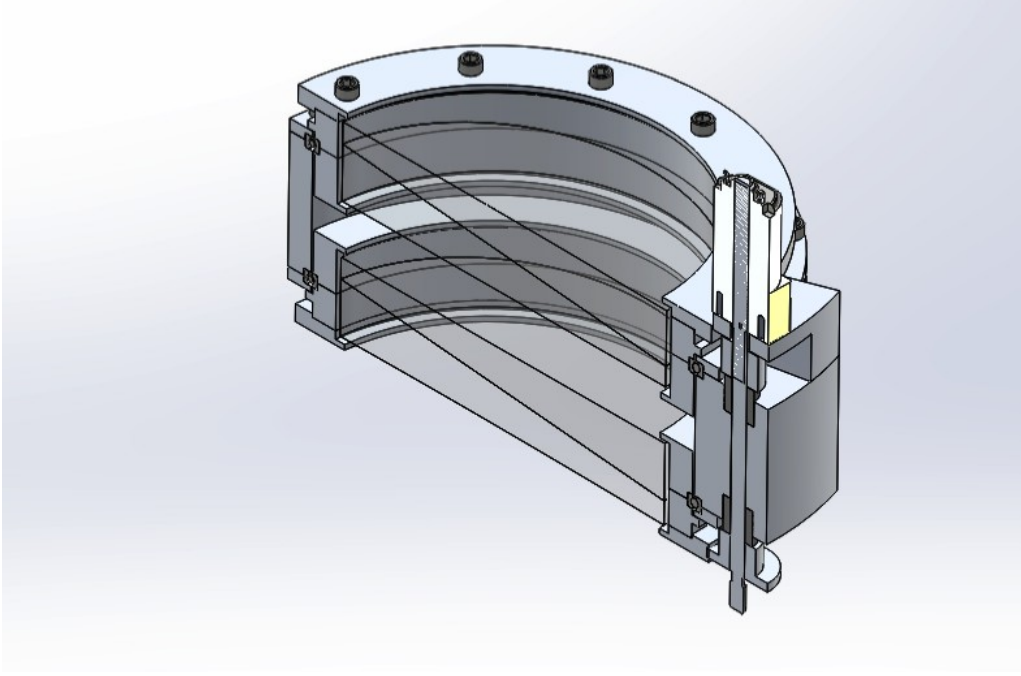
ADC mount showing section through the motor and the gear that drive the lower ADC element.
